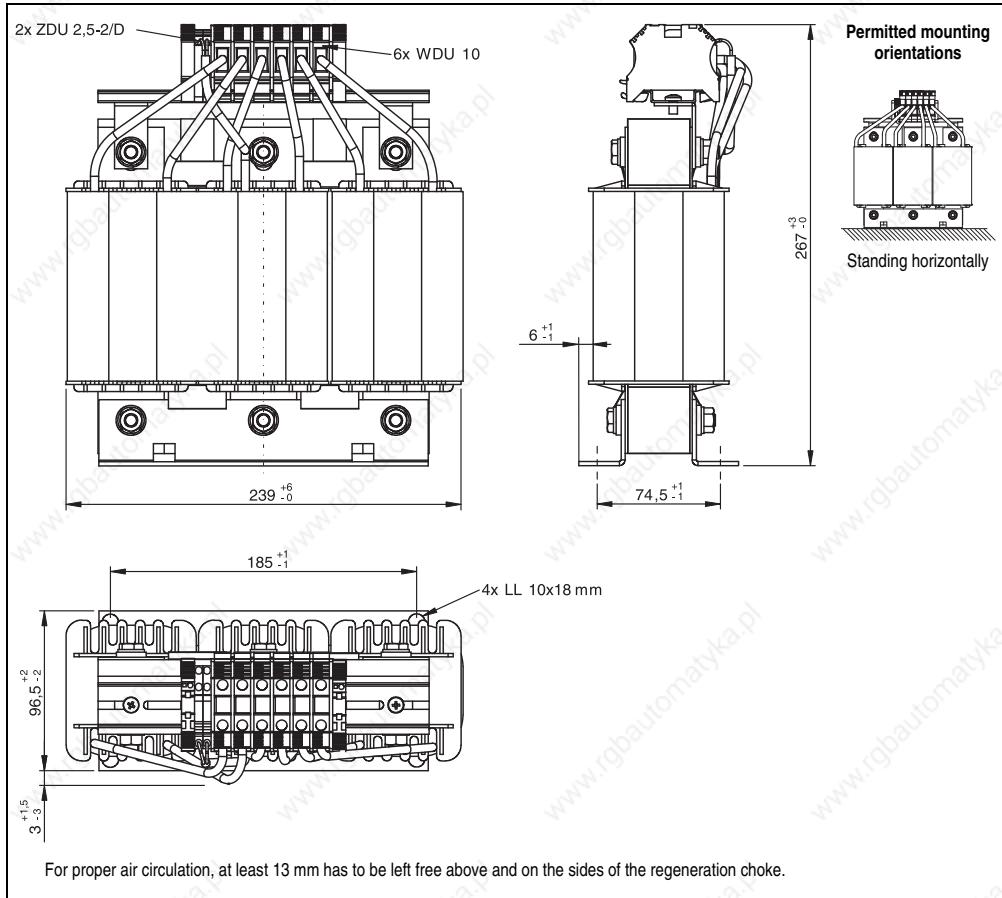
Dimensional diagram and installation dimensions for 8BVR0220H000.100-1
